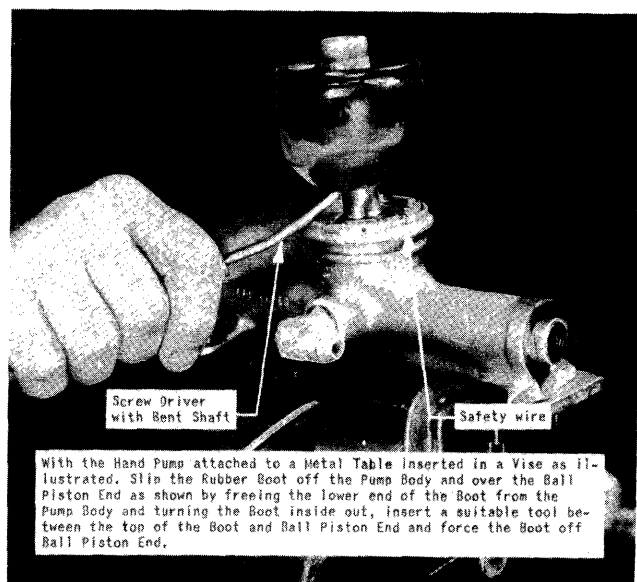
Removing Rubber Boot from Hydraulic Hand Pump
